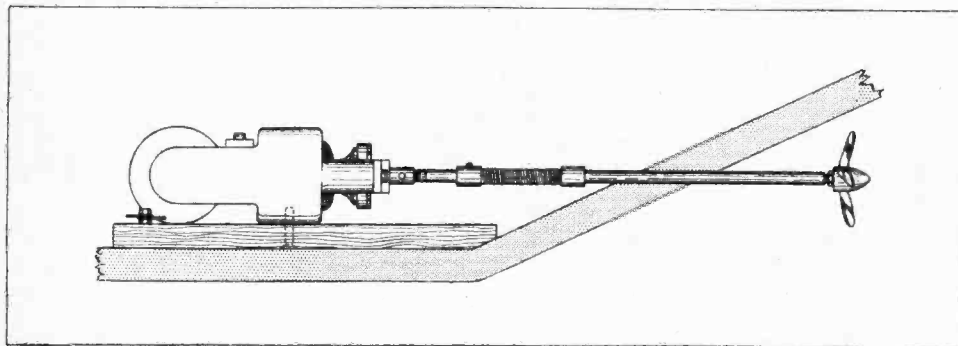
Showing how the motor and the propeller shaft are mounted in the bottom of the boat.
